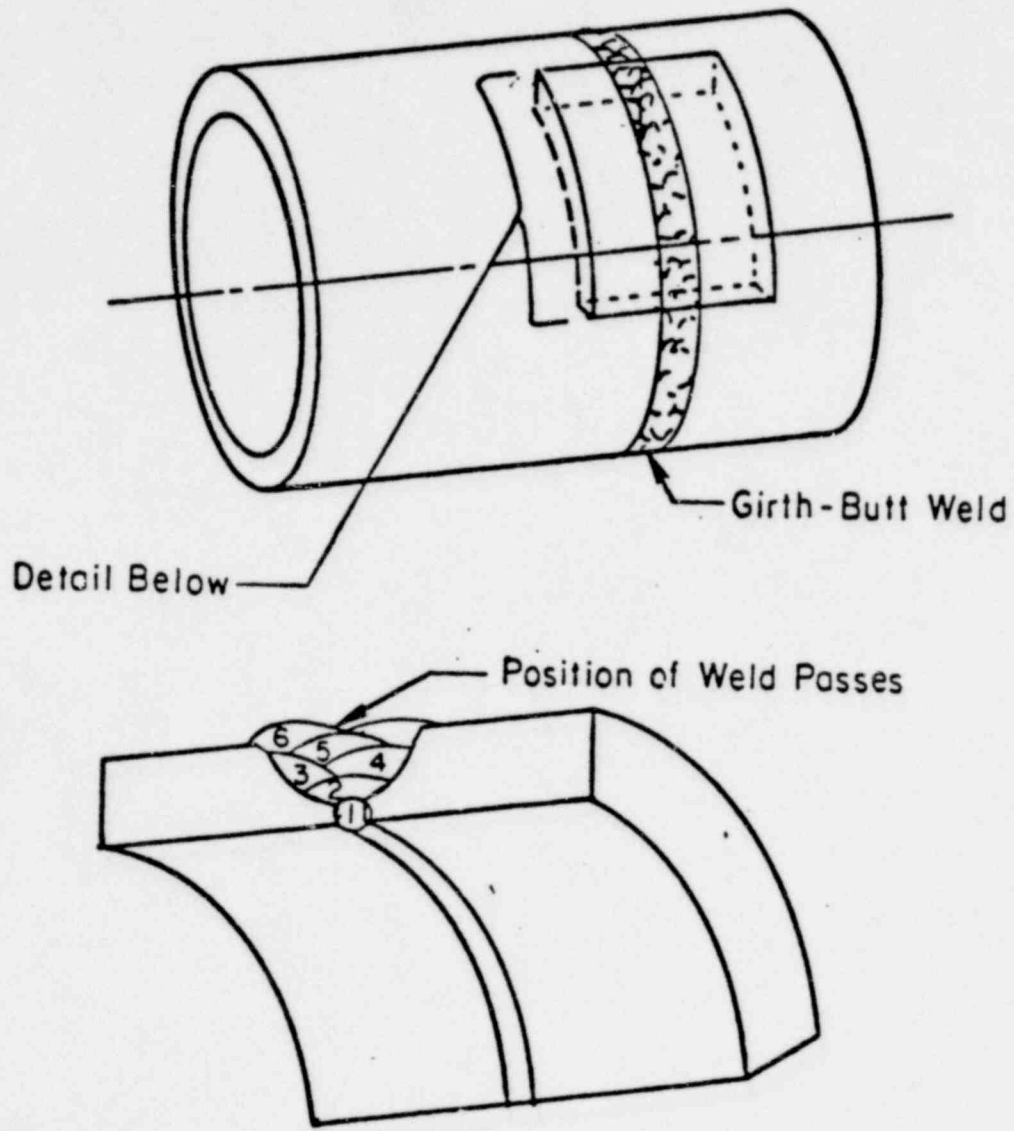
ILLUSTRATION OF GIRTH-BUTT WELD
